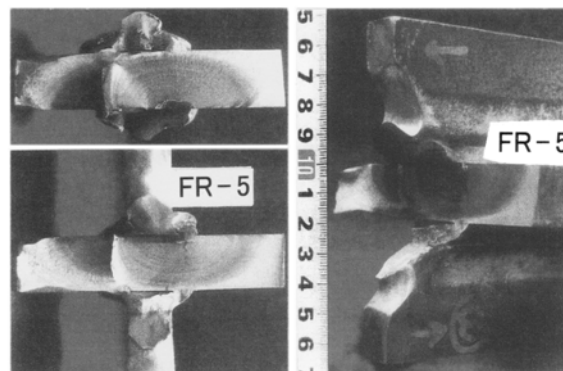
Fracture surface and pass after fatigue test (Type FR, 150 N/mm<sup>2</sup>,  $2.15 \times 10^6$  cycles)
